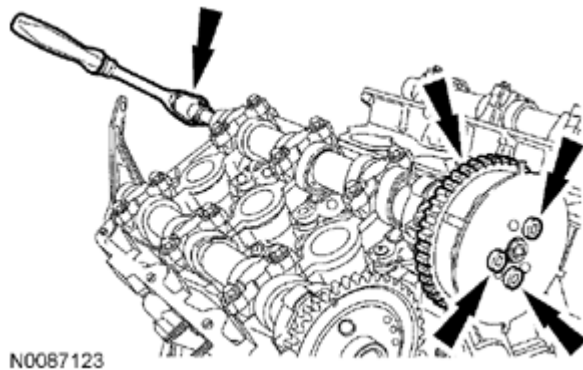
Remove/Install RH Camshaft Phaser, Sprocket And Bolts
